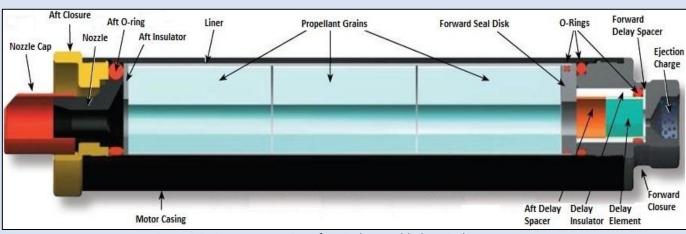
Cutaway Drawing of Typical Assembled RMS-Plus Motor
